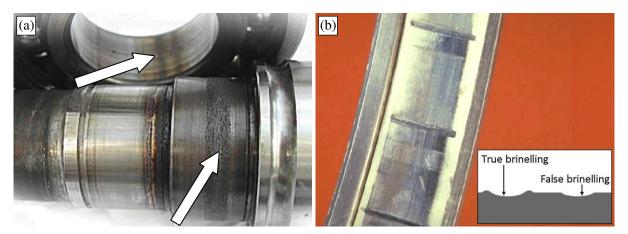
Bearing surfaces damaged by fretting (vibration) wear: (a) powder wear debris and change of colour on inner ring and shaft, due to the insufficient clearance and (b) equally spaced depressions and shiny worn areas (false brinelling) on inner ring due to the insufficient press fit.
